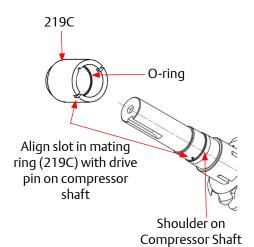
The Alignment of Compressor Shaft and Mating Ring
